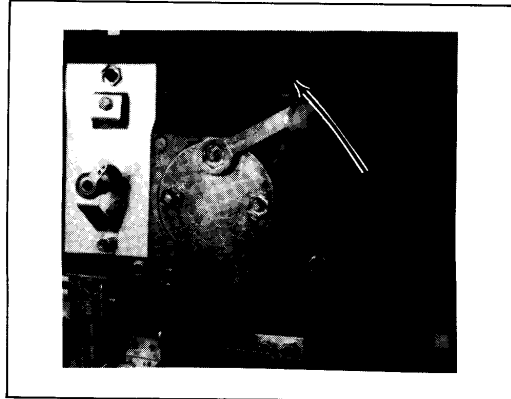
shows the surfaces to clean inside the coin mechanism. These include the inside surface of
